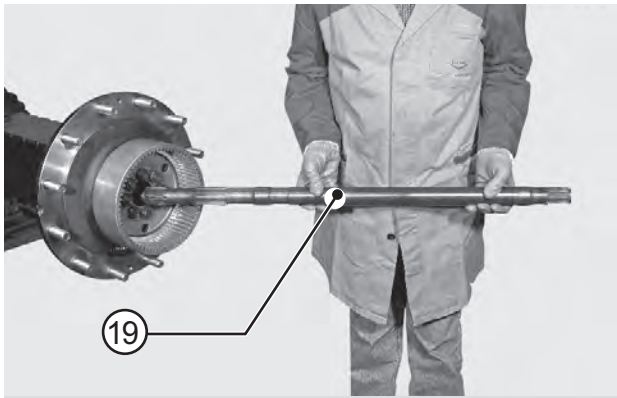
Grease sealing face of axleshaft (19). Install the axle shaft (19) making sure it is properly engaged in the braking disks and in the differential unit.
